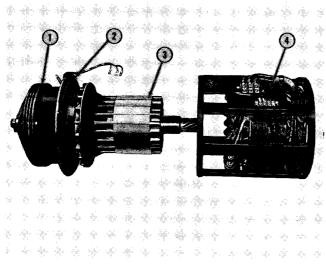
ROTOR	AND	BRAKES,	REMOVED
